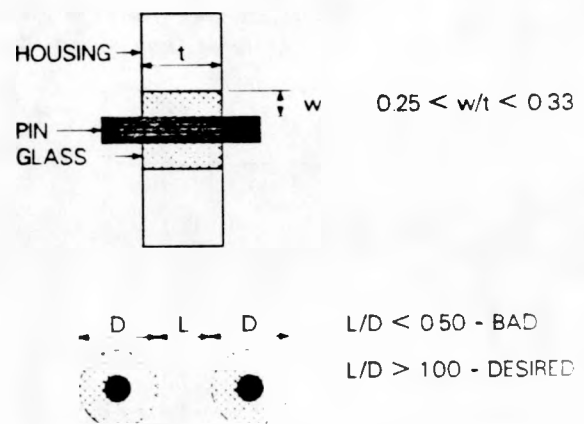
Design Guidelines for Coaxial Compression Pin Seals (Miller and Burchett, 1982)
